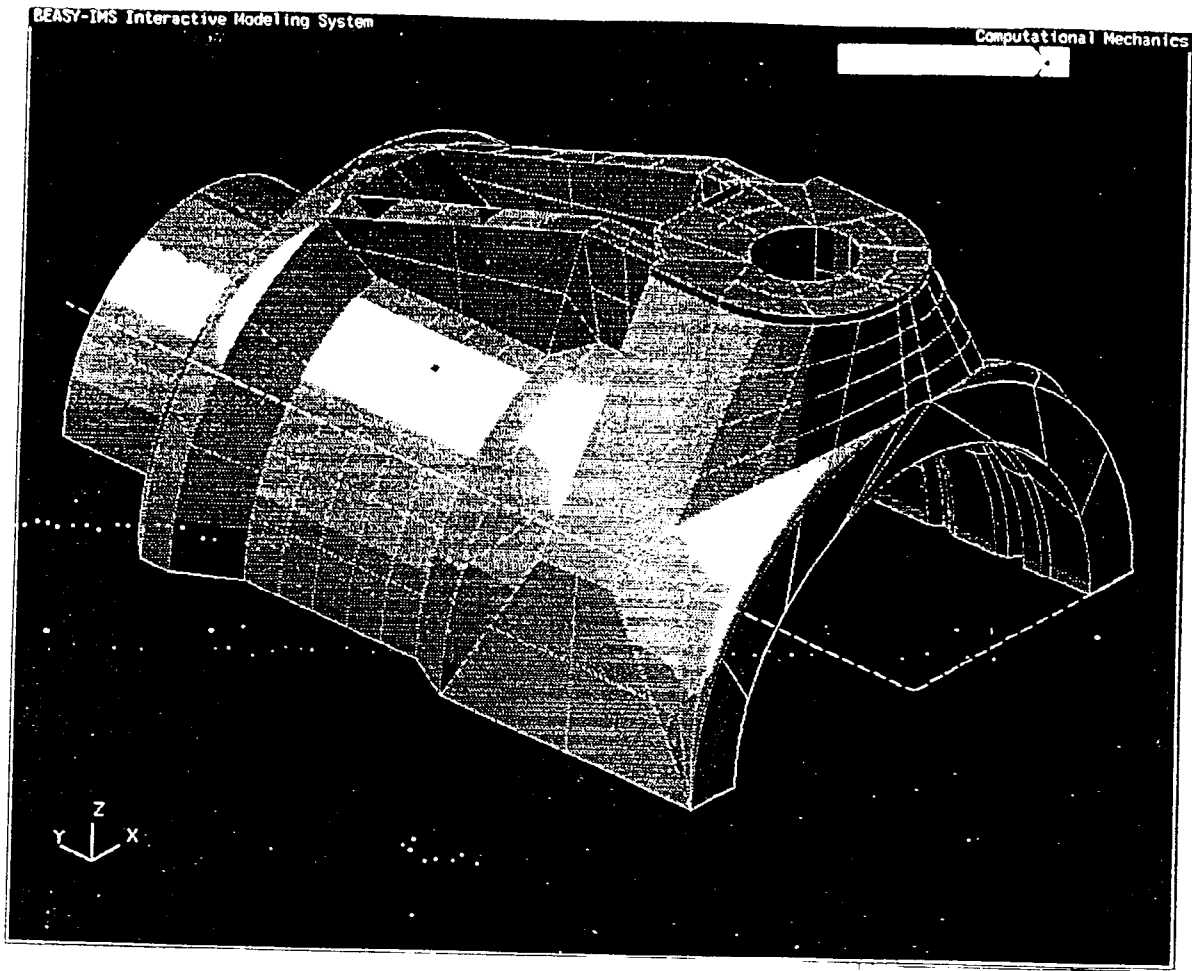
BOUNDARY ELEMENT MODEL OF A JET ENGINE FUEL CONTROL HOUSING SECTION WITH AN INSERTED BUSHING
